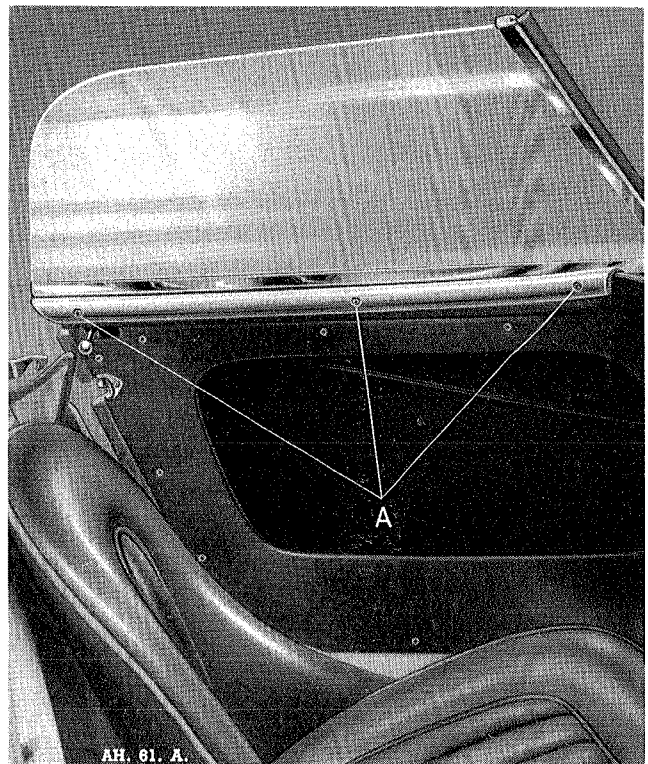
The door top moulding is held in place by three cross-head screws A.
